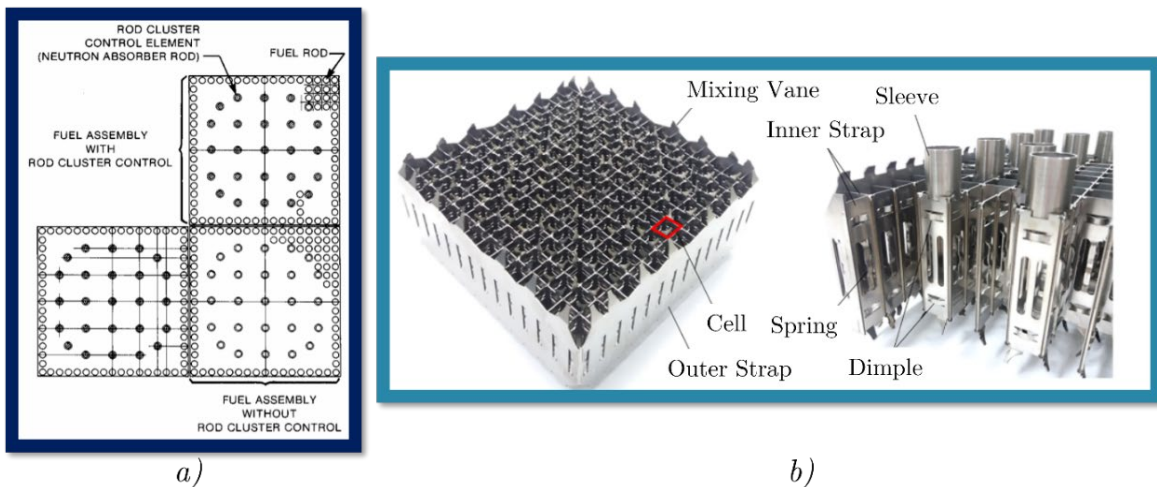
Example of PWR assembly and control rod layout republished from Westinghouse design [179], b) spacer grid components [199].
